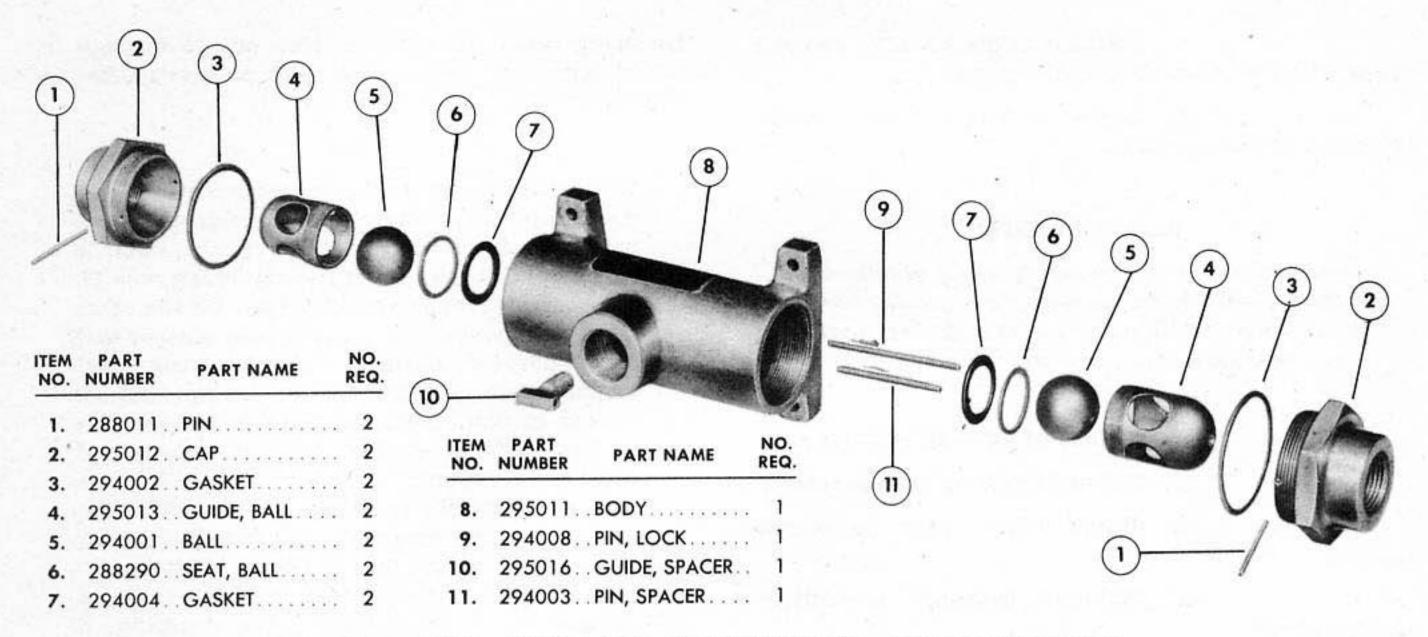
FUEL BALL CHECK VALVE - EXPLODED VIEW
